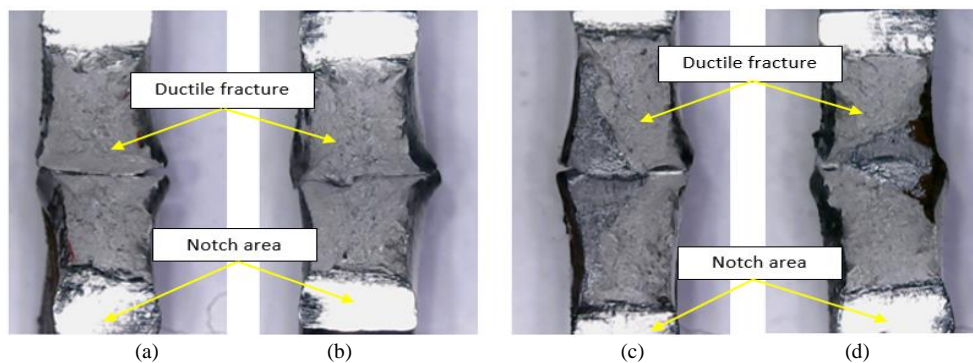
Impact test fracture (a) without PWHT, (b) PWHT 400°C, (c) PWHT 600°C and (d) PWHT 900°C
